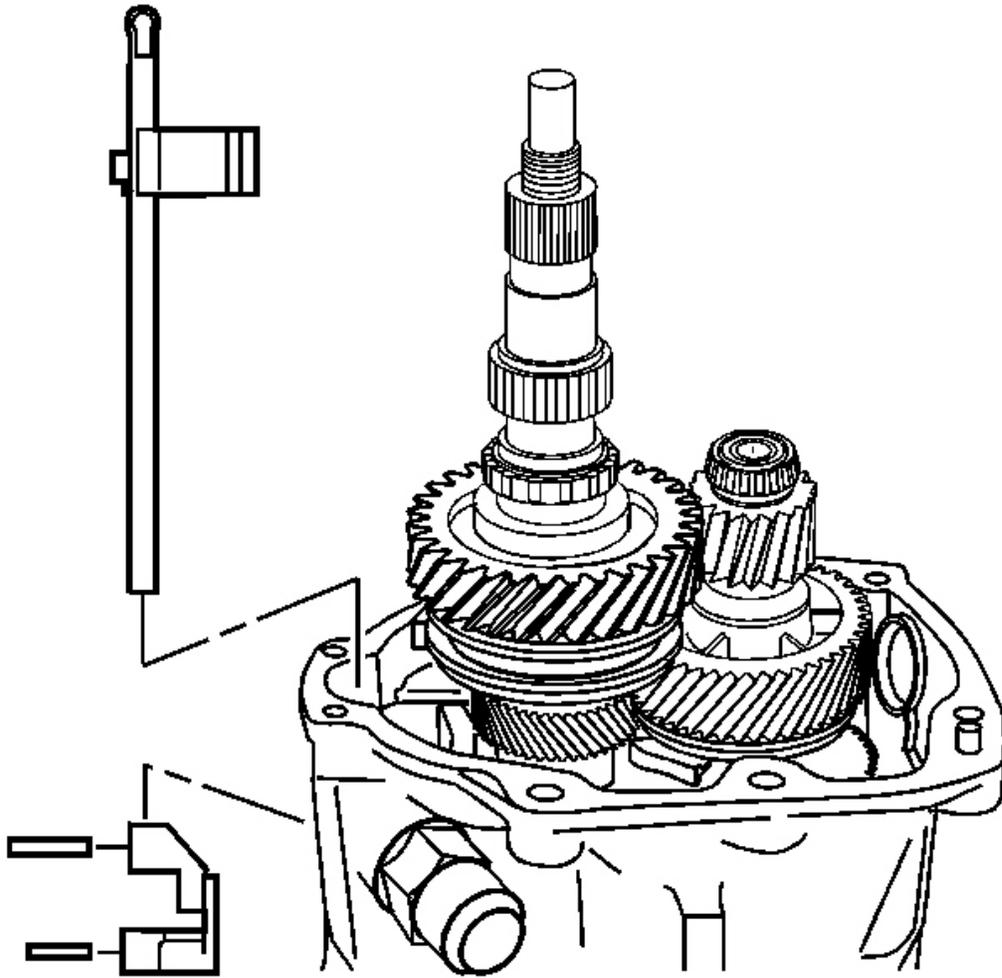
Identifying Shift Guide, Rollpins & Shift Shaft Extension
